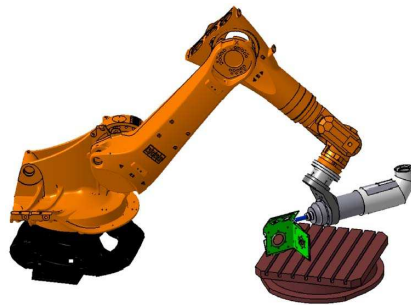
Optimum workpiece placement for KUKA KR270-2 robot [87]
